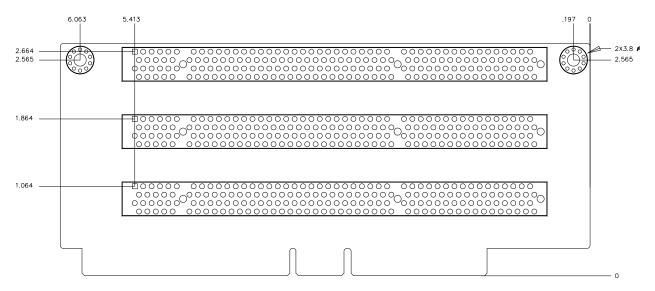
3-Slot PCI Riser Mechanical Drawing
